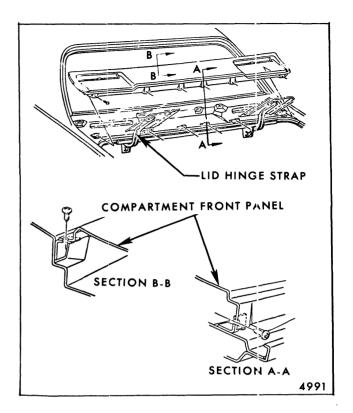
Rear Compartment Front Panel - "12" Oldsmobile Style
